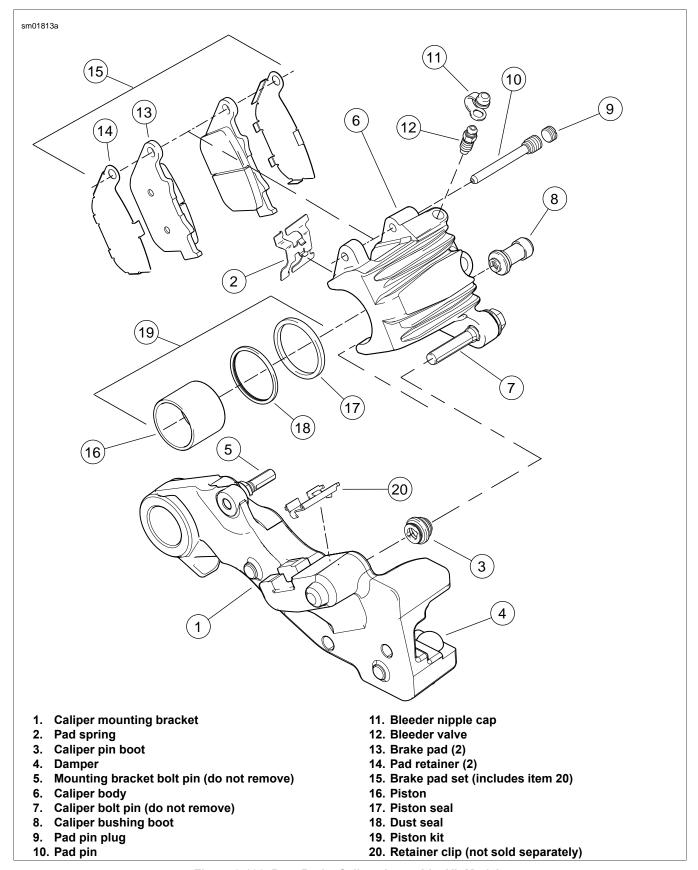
Rear Brake Caliper Assembly: XL Models
